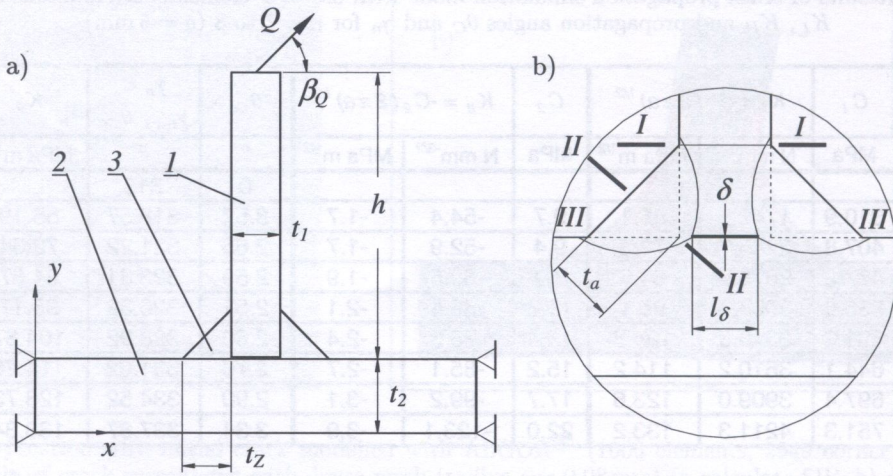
Two steel plates 1, 2 with fillet weld joint 3; a) dimensions and loadings of the joint, b) dimensions and characteristic cross-sections of welds with thickness $t_a = t_z/\sqrt{2}$
